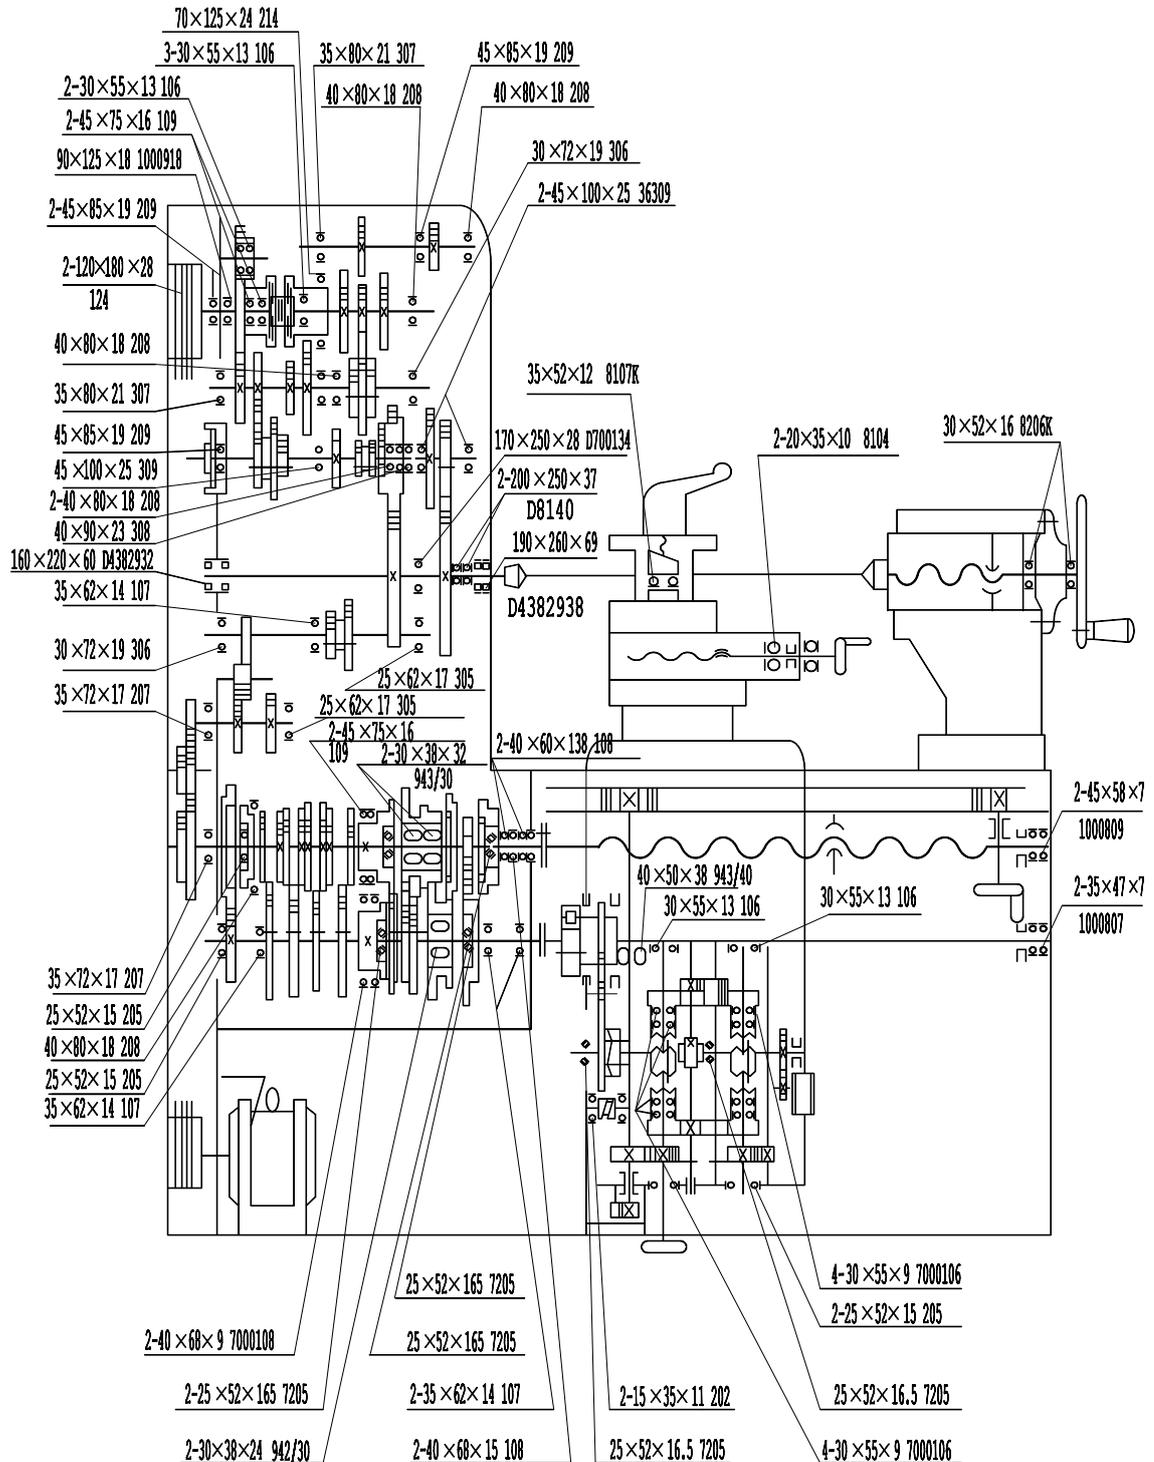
Arrangement of Roller Bearings of CW63C and CW93C
